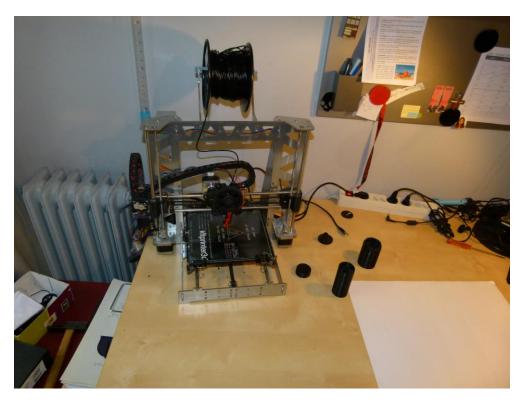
Prusa i3 steel used to print the pillbox parts once assembled and functional, already printed parts of the pillbox can be seen beside the printer
